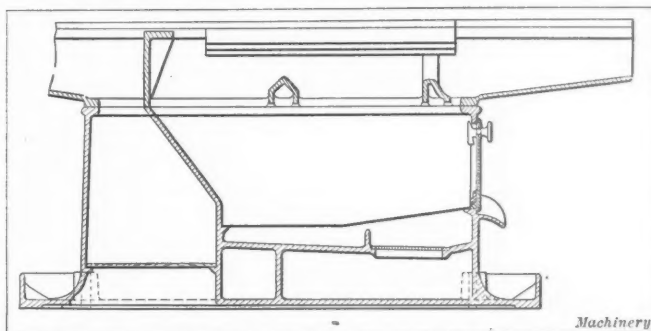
Hollow Base of Turret Lathe used for receiving Chips and Lubricant—Tool Cupboard at Left
